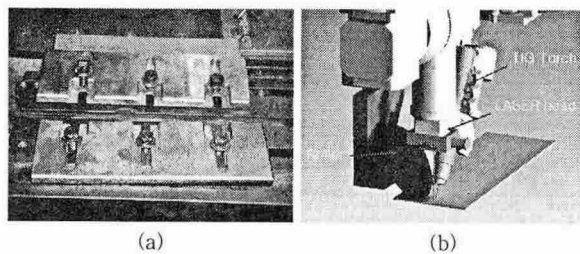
Welding jig systems for lap joint ; (a) Screw type jig, (b) Roller type jig
